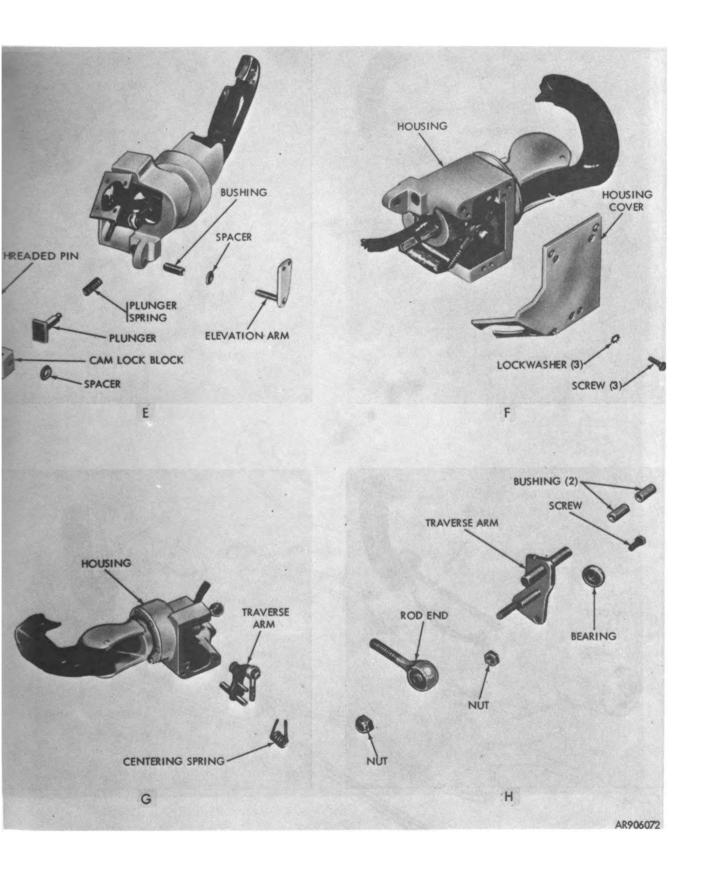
Commander's control disassembly or assembly (2 of 4).
